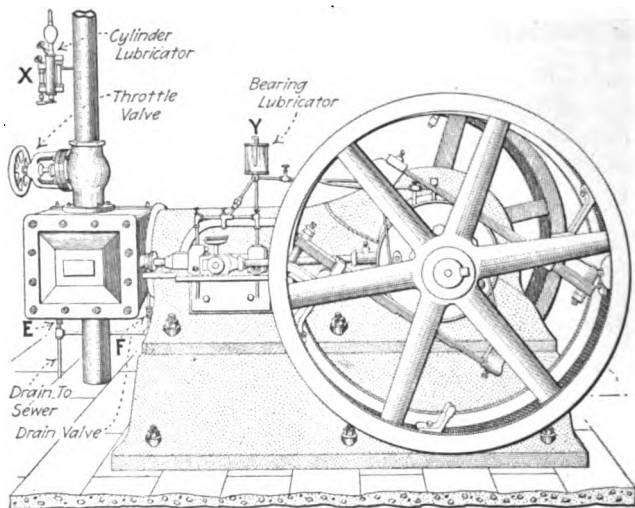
Simple slide-valve automatic engine. (Erie Engine Works.)
